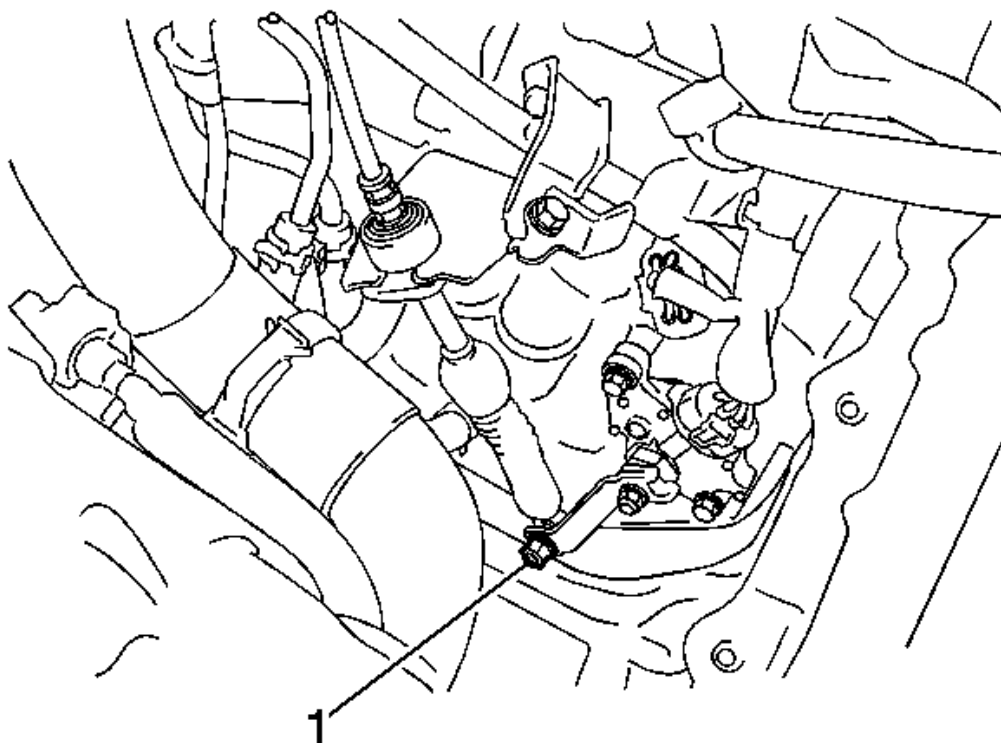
Locating Cable Assembly & Control Shaft Lever Bracket
